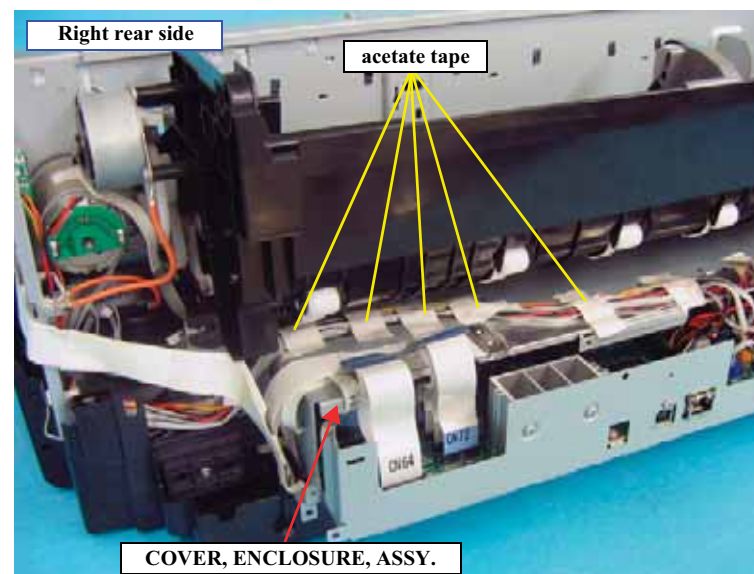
Releasing the PAPER, DETECTOR, ASSY. (PE SENSOR) Cables
